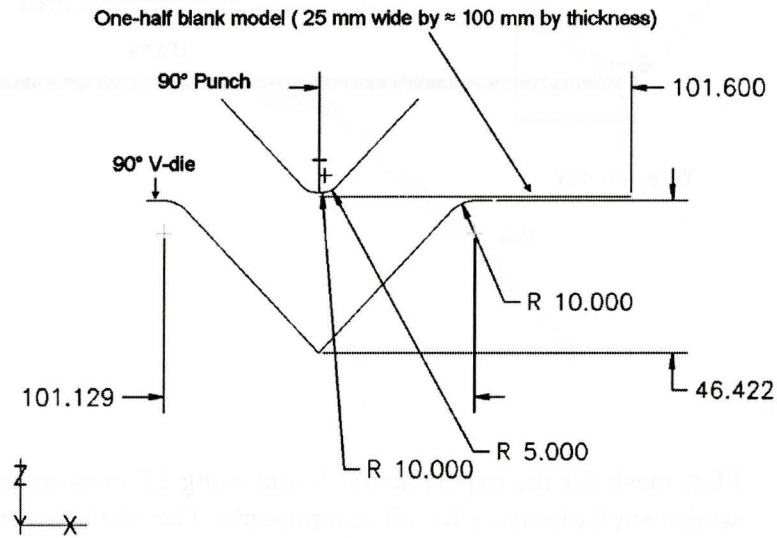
2D CAD drawing of the experimental V-die tooling geometry (all dimensions are in mm).
